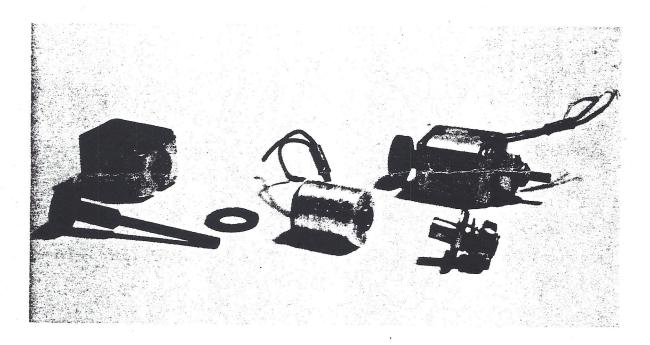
Solenoids used in typewriter driver made on a sewing machine bobbin winder.
